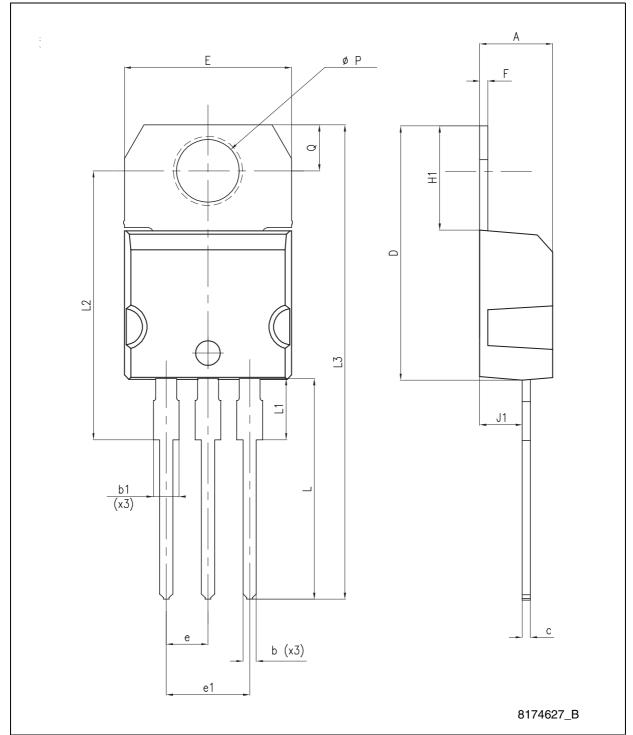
Drawing dimension TO-220 (type STD-ST Single Gauge)
